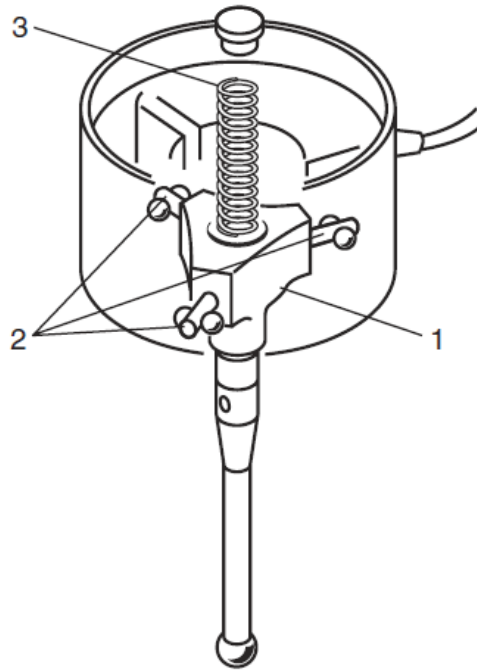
Schematic view of the working principle of a high precision tactile sensor; (1) pivotal plate with attached steel rod, (2) spring loaded bearing points, (3) Spring [27]
